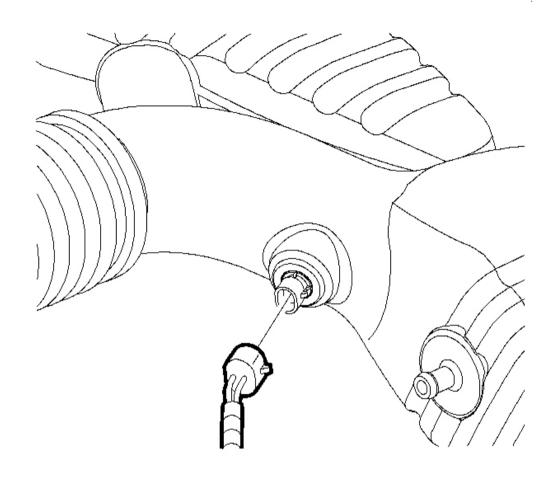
View Of Intake Air Temperature Sensor Connector Courtesy of GENERAL MOTORS CORP.
